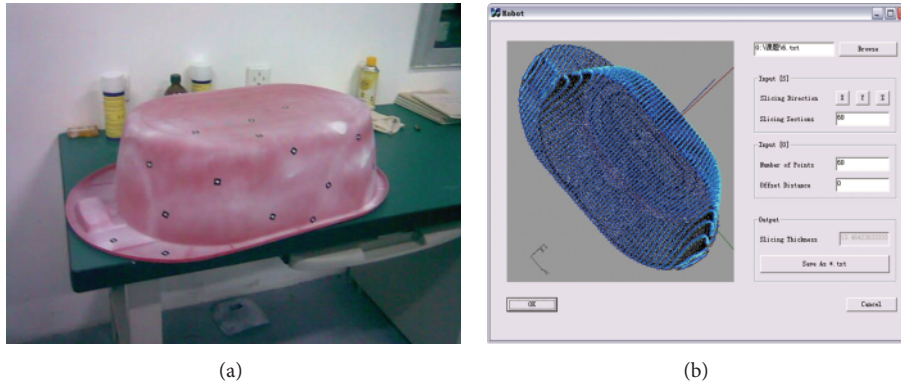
(a) The workpiece. (b) The triangular approximation of the workpiece.
